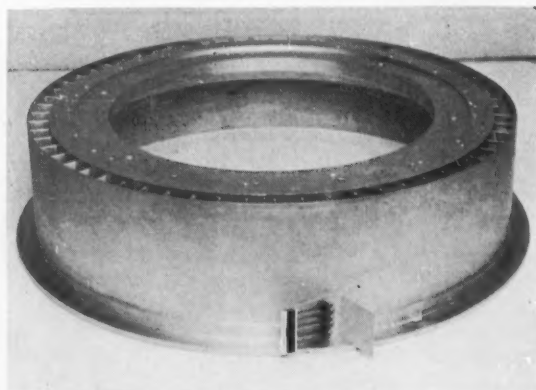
An aircraft gas turbine diffuser vane and shroud assembly fabricated of Type 4130 moly steel. The inner ring and vanes were machined from a solid forging. This in turn was vacuum brazed to the relatively thin shroud assembly at 2100°F, using AMS 4775 filler metal (chrome, nickel, silicon, boron, iron). Due to the several sections of dissimilar mass, development of very carefully controlled heating and cooling cycles was necessary.
